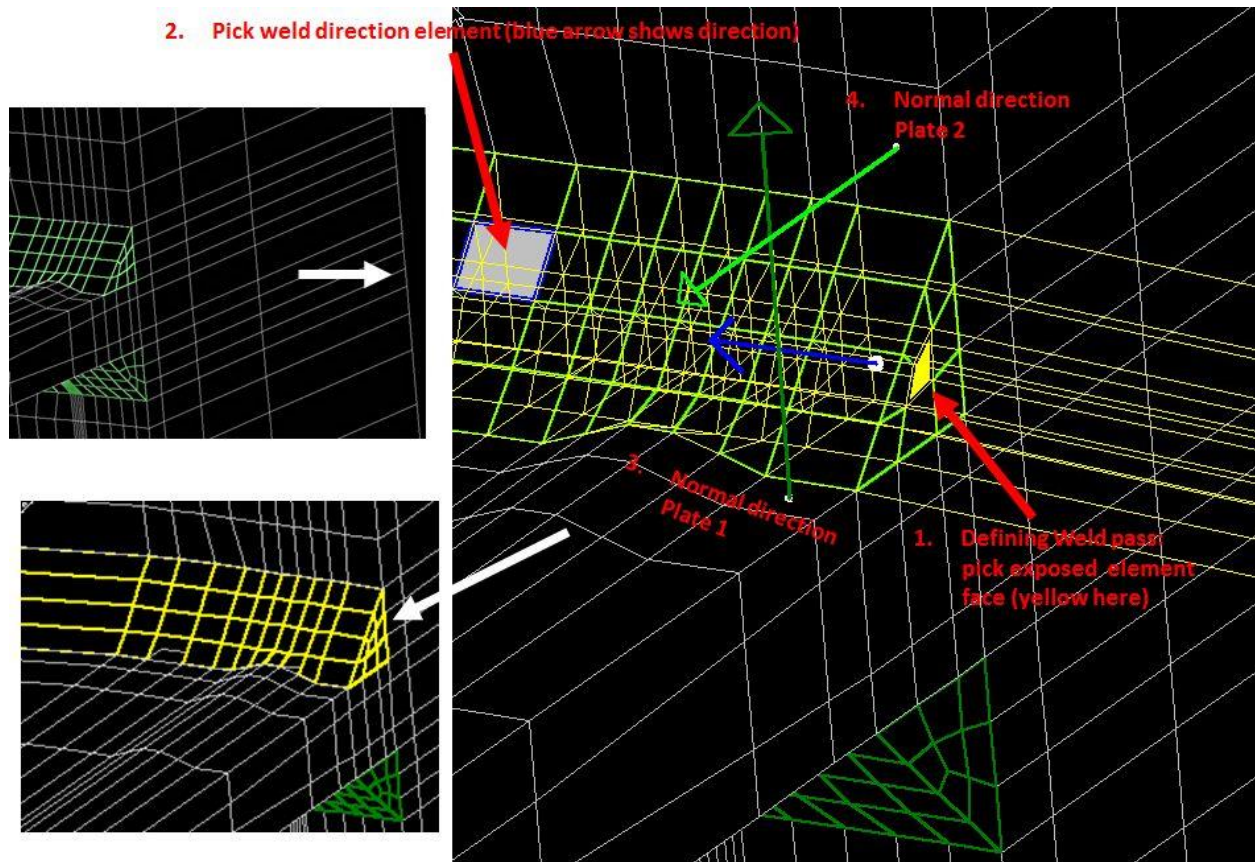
Choosing weld pass for Tee-Fillet weld in submarine
